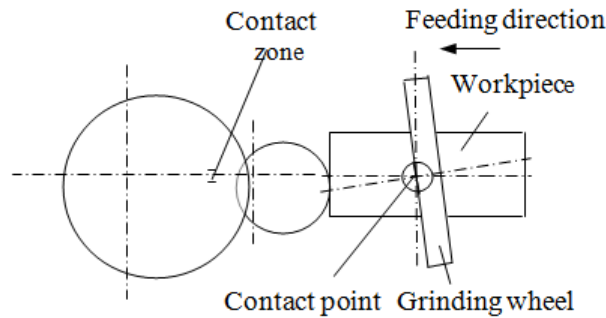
Contact Diagram of Wheel and Part in Quick-point Grinding
